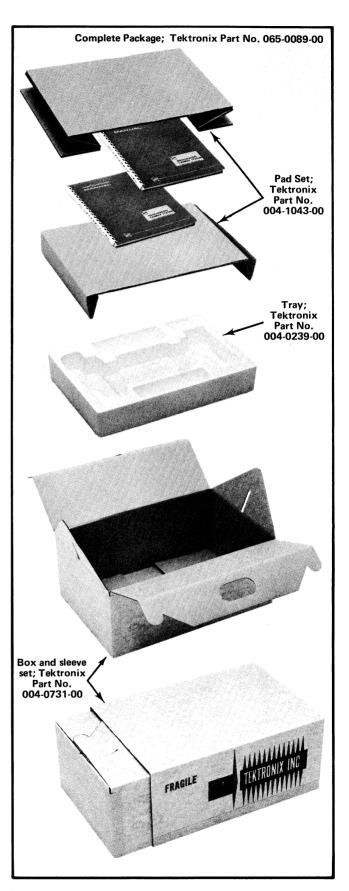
Exploded view of packaging parts showing assembly and Tektronix part numbers for replacement purposes.
